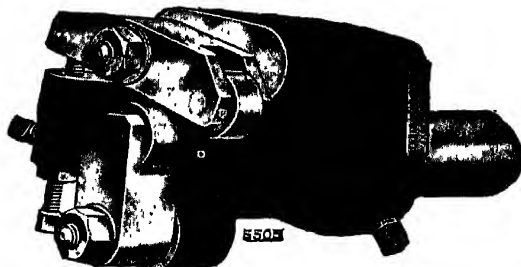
ROLLER SUPPORT FOR STEADYING WORK
